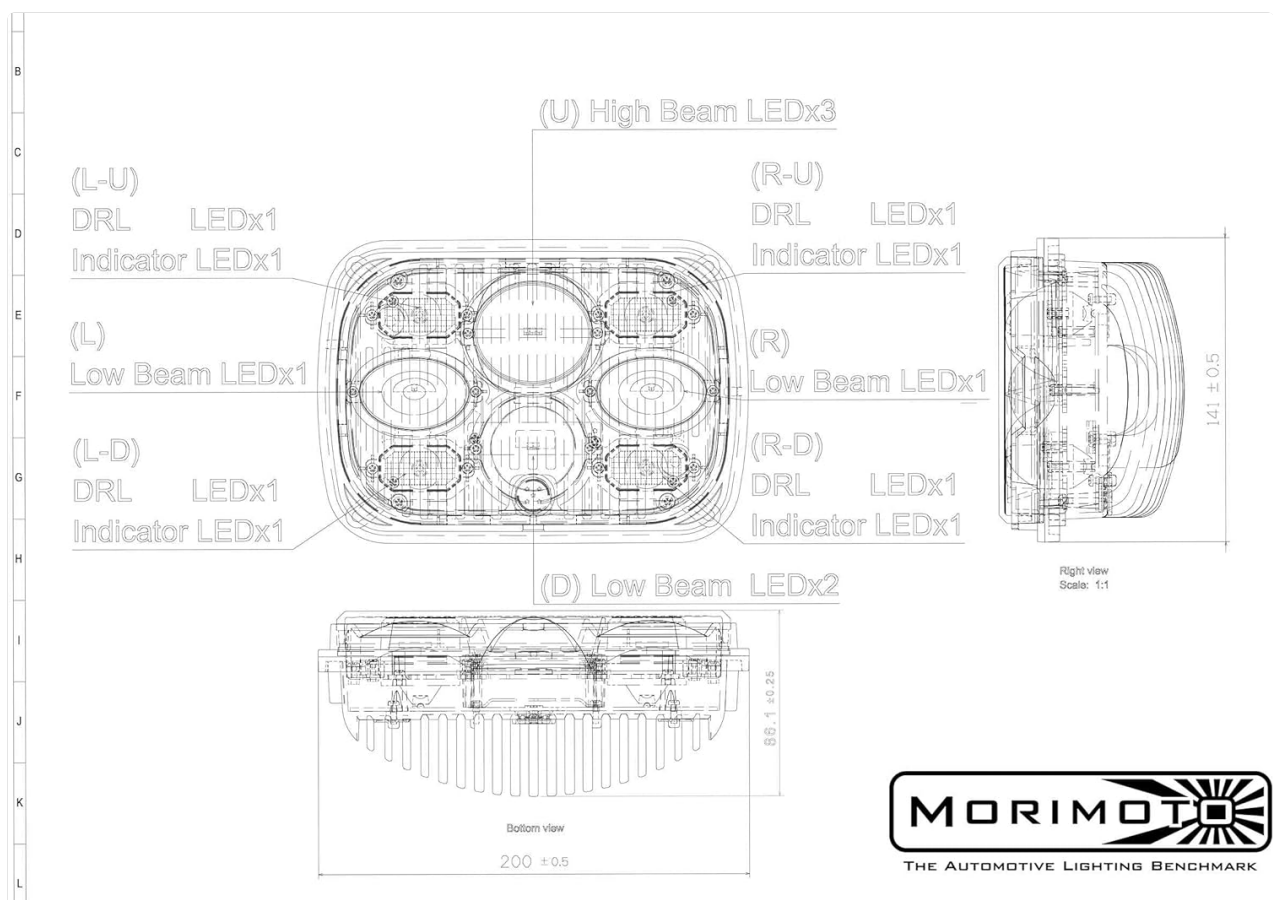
Technical diagram providing dimensions and component labels for the Morimoto Sealed5 LED Headlight.
